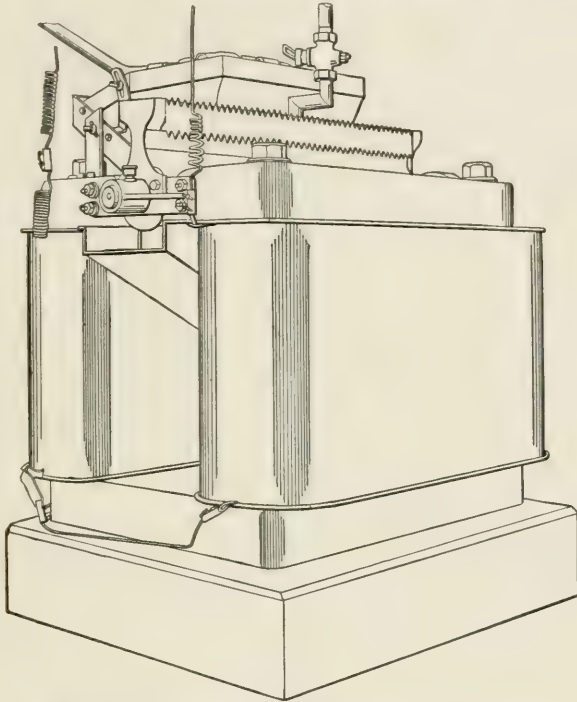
THE HUMBOLDT WET SEPARATOR.
